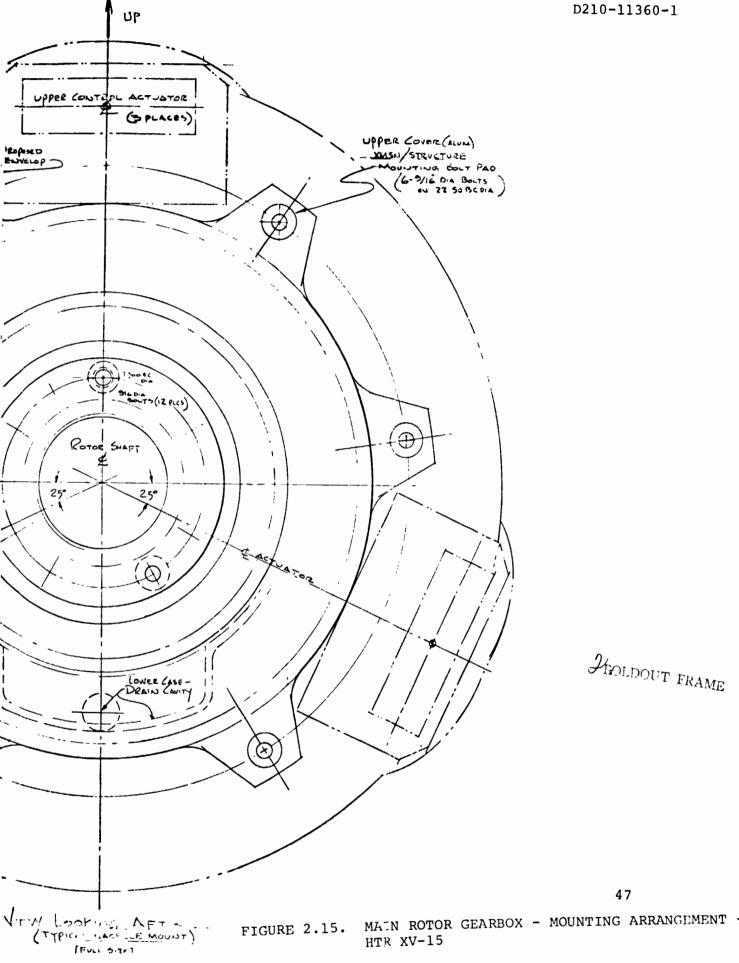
MAIN ROTOR GEARBOX - MOUNTING ARRANGEMENT -HTR XV-15
